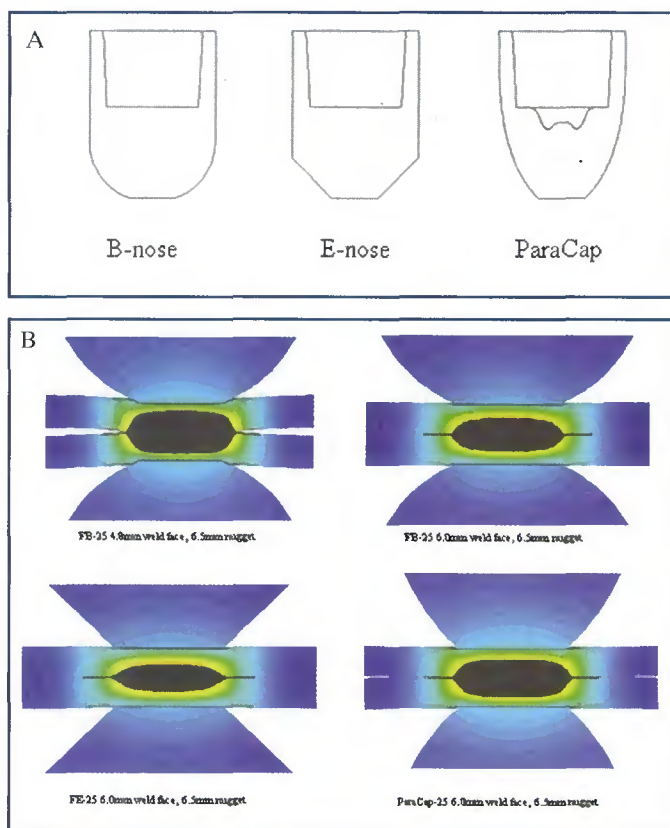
A — A selection of the electrode styles used in resistance welding; B — RSW electrode geometry FEM models simulated for a target weld size of 6.5-mm nuggets on 1.6-mm DP800 steel.
